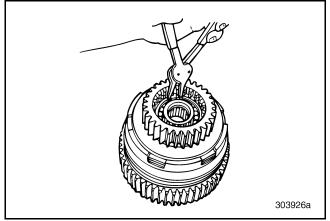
Installing Gear Snap Ring (T313L/T318L Shown)
